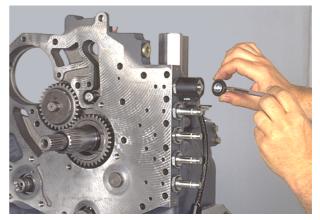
With new "O"-ring in position, install coil to cartridge nut. Tighten cartridge nut per assembly instruction drawing.
